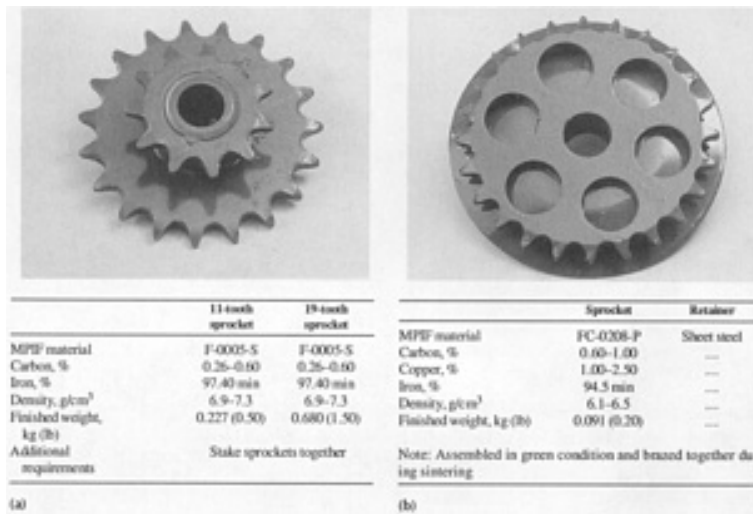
Powder metallurgy sprocket assemblies in an agricultural planter. (a) Dual sprocket assembly. (b) Sprocket and retainer assembly
